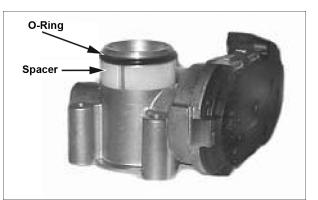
O-Ring and Spacer Within Mixer Adapter Assembly
